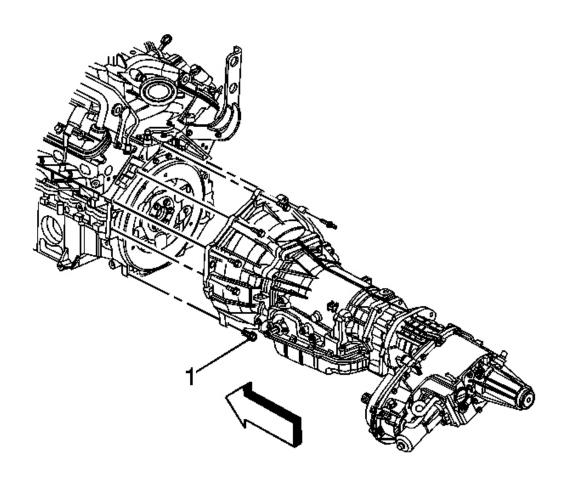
View Of Lower Bellhousing Bolts Courtesy of GENERAL MOTORS CORP.
